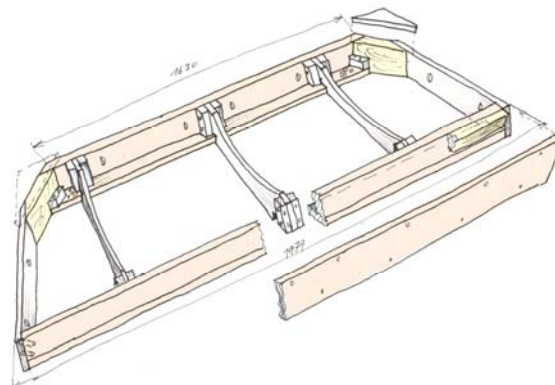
Supporting frame, assembling unit [C]: Seat frame
